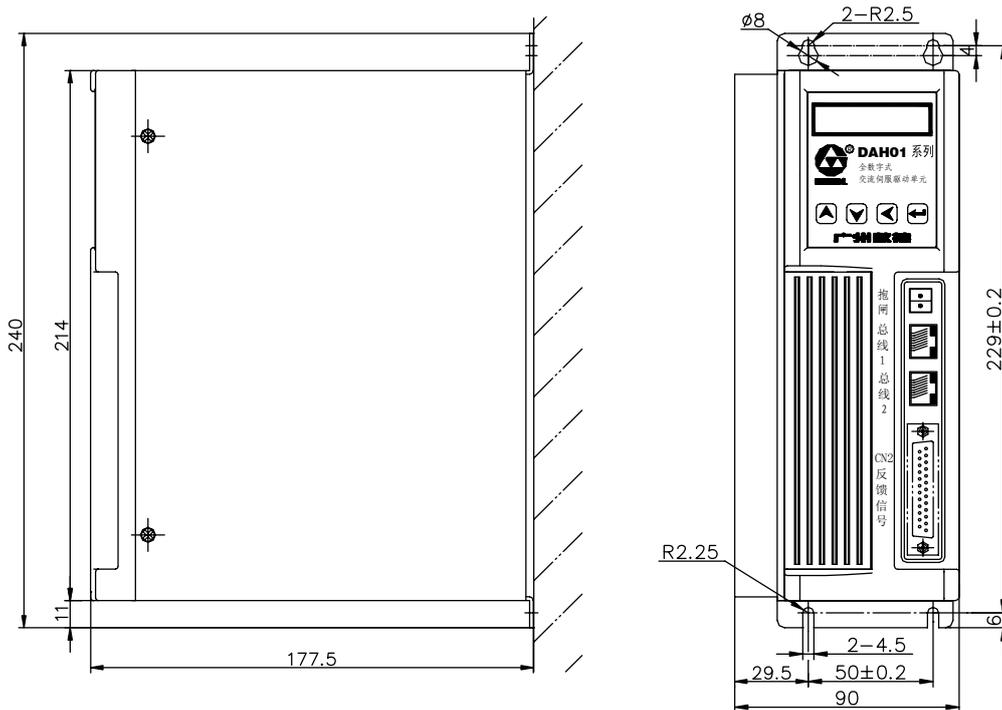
Base-plate Installation Mode for Drive Unit
